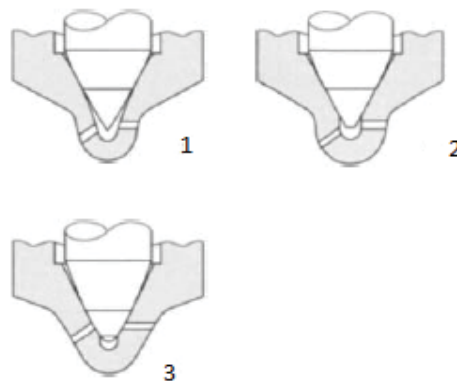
(a).Hole-type nozzle with conical blind hole, (b)Hole-type nozzle with cylindrical blind hole.(c)Seat-hole nozzle[3]
